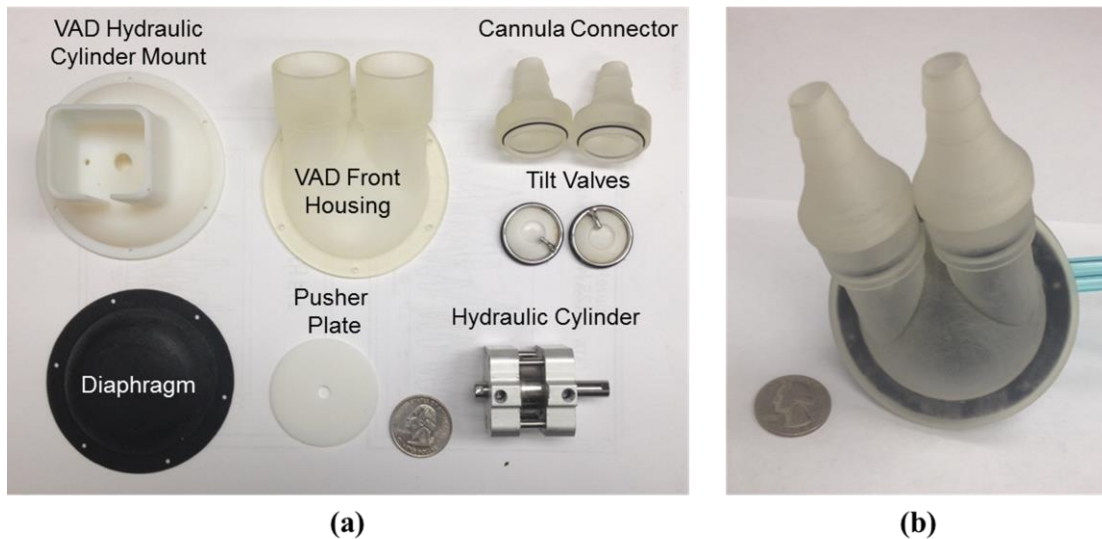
(a) 3D printed fabricated parts for the UCLA 25 mL Pediatric PiezoVAD and (b) the fully constructed blood pump prototype
